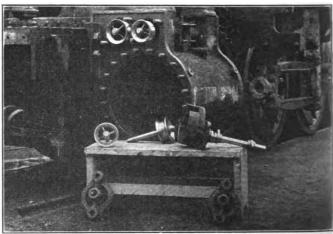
The Four Poppets and the Cam Shaft of the Lentz Valve Gear
